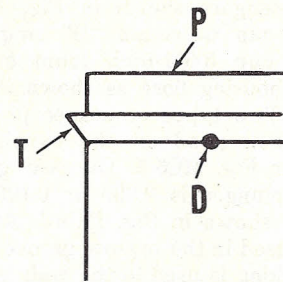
Tapered piston rings on some models must be installed so that taper (T) is towards top of piston (P). Locating dot (D) on ring will be towards bottom when installed correctly.
